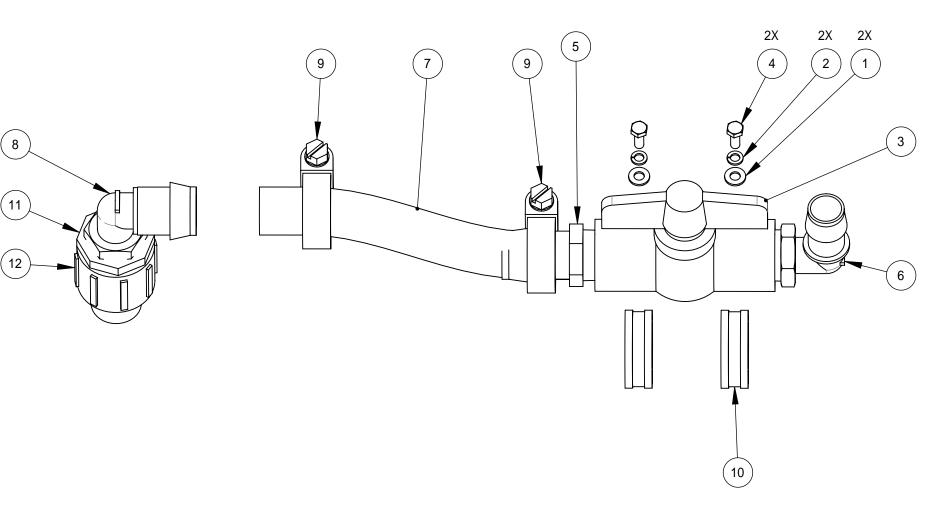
EWS HydraCradle Tank Hose and Fittings Assembly 000-078-103 Rev. A
